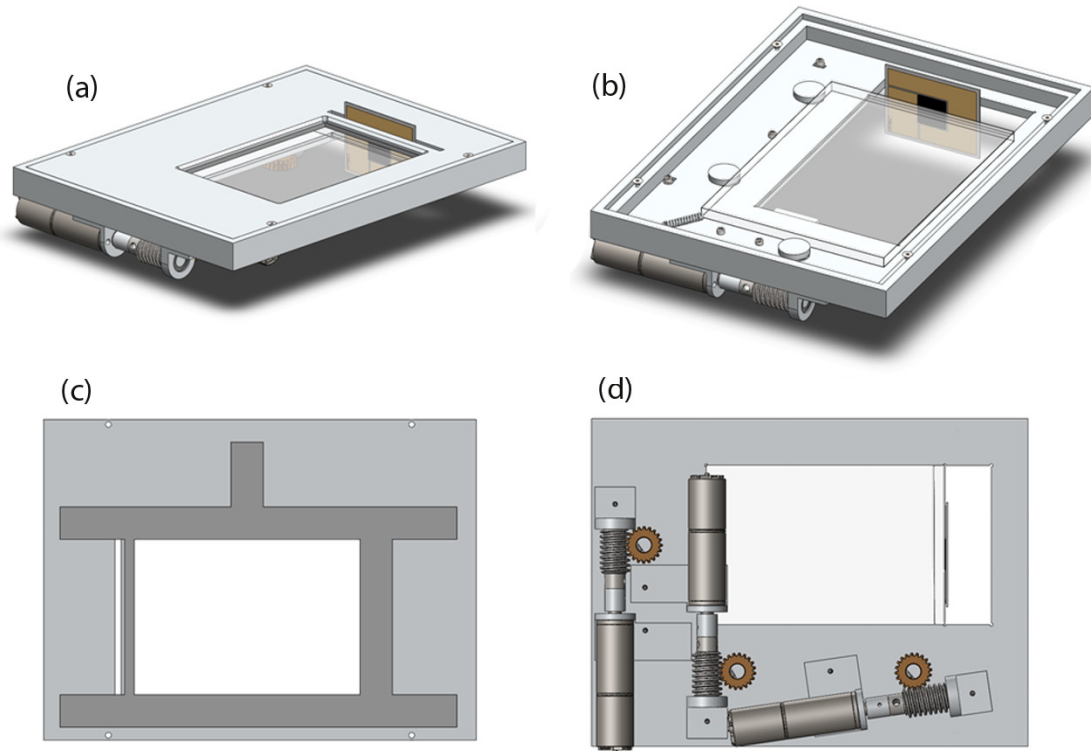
Assembled parts. (a) Assembled PMSC micro-tracking platform. (b) Assembled platform without cover. (c) Bottom view of platform cover with attached plastic shim. (d) Bottom view of platform with attached motors and worm drives.
